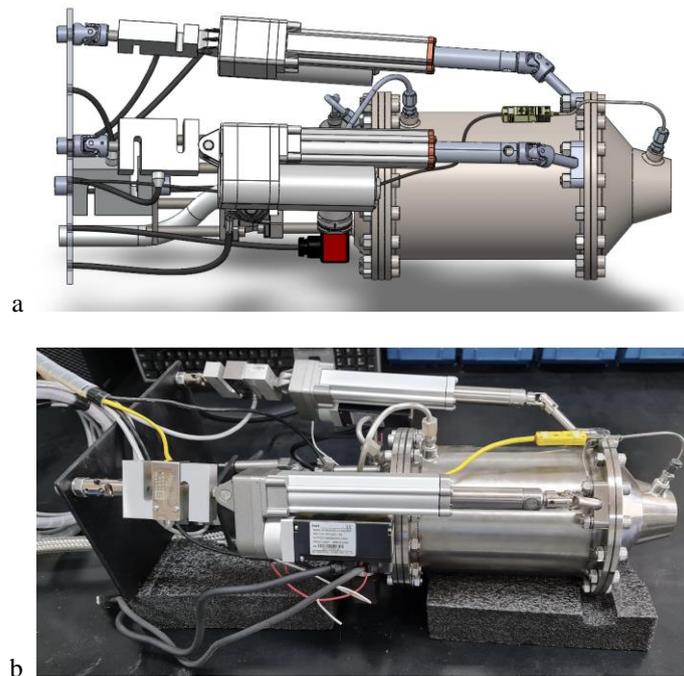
Hybrid rocket engine assembled with TVC: a - 3D model, b - test model.
